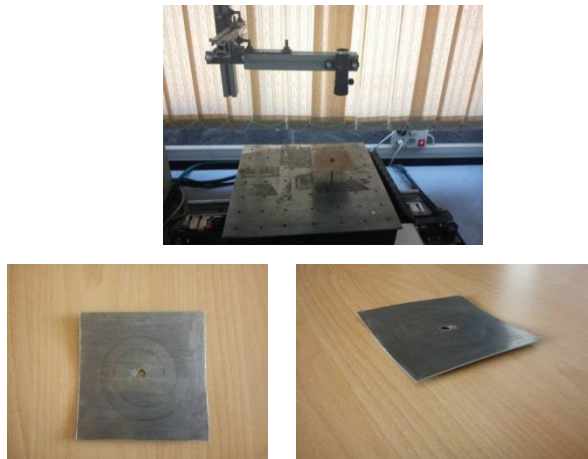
Experimental set up for laser forming of a saddle shape and formed specimens
